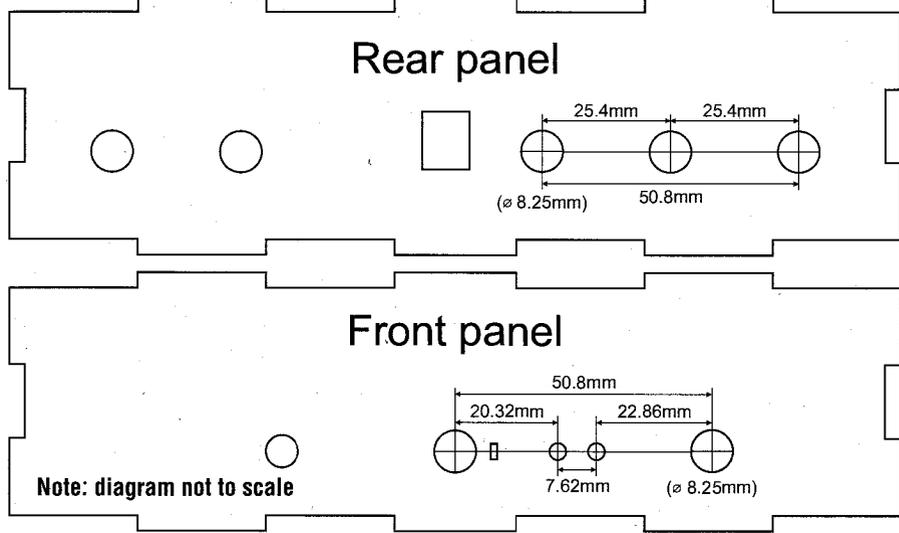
here's where to drill the extra holes in the rear panel (for the mixed output RCA socket, CON5) and in the front panel (for panpot VR2) if required
